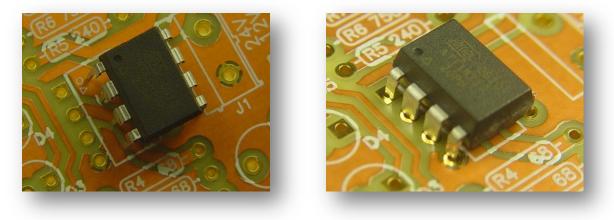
Pin 1 is identified by a molded dimple in the IC package, an etched triangle and a square pad on the PCB.
